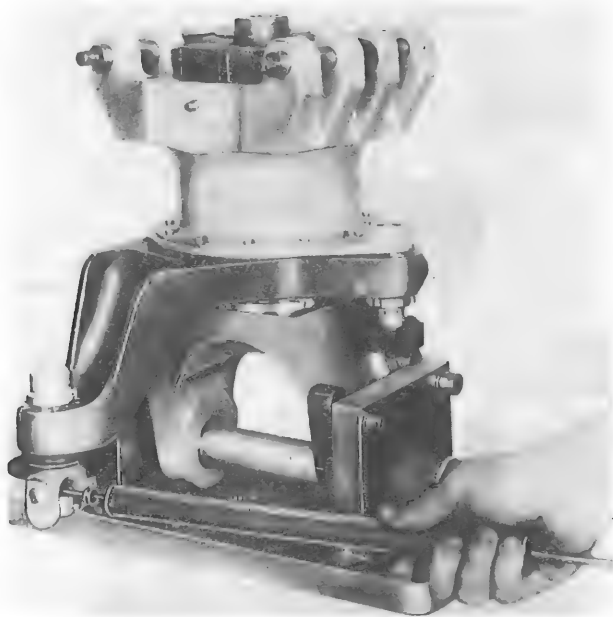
Checking Rotational Drag on Sleeve Spindle Bearings
